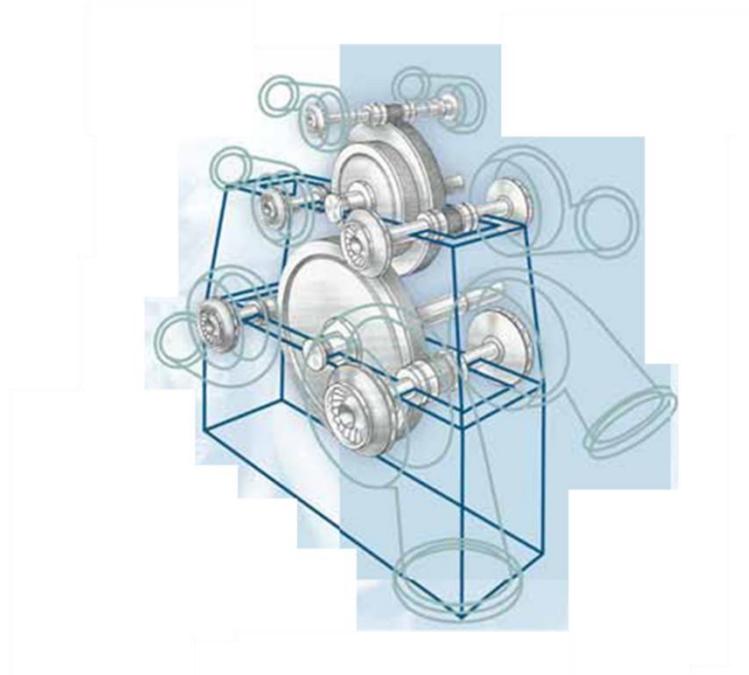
MAN Turbo 10-stage integrally geared compressor
